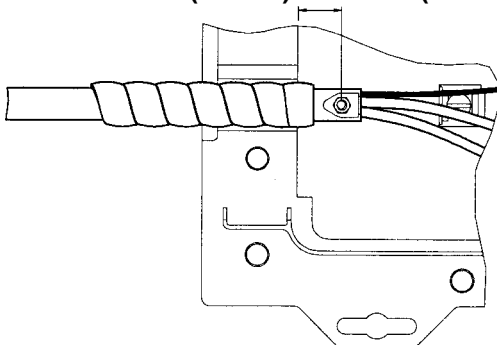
POSITION CABLES WITH SHIELD CONNECTOR IN BOTTOM SHELL HALF
